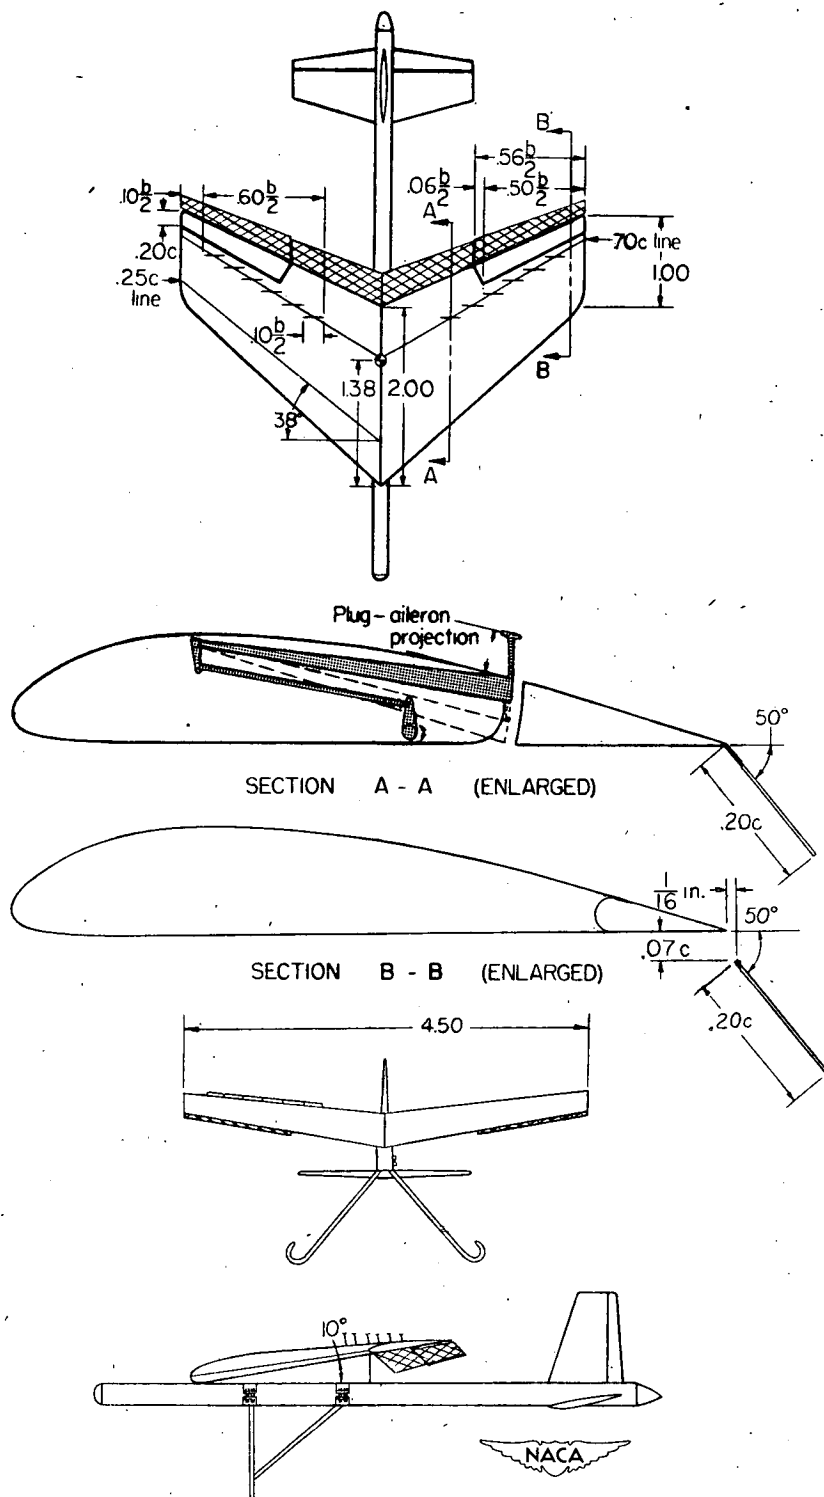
Three-view sketch of free-flight-tunnel model and cross section of wing showing details of plug ailerons. All dimensions are in feet unless otherwise specified.
